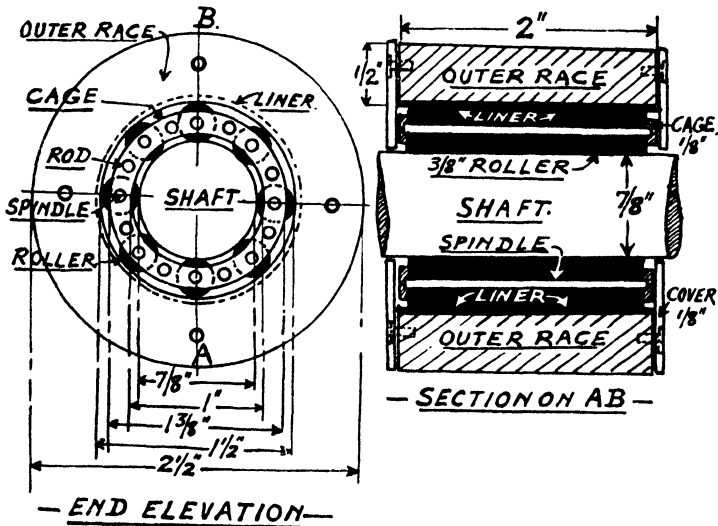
E shows in end elevation and section the arrangement of a roller-bearing of medium type, provided with a roller-cage for the same purpose as stated above. Such a bearing is used when heavy loading on a shaft occurs. A larger bearing surface takes the load, and less wear results.
